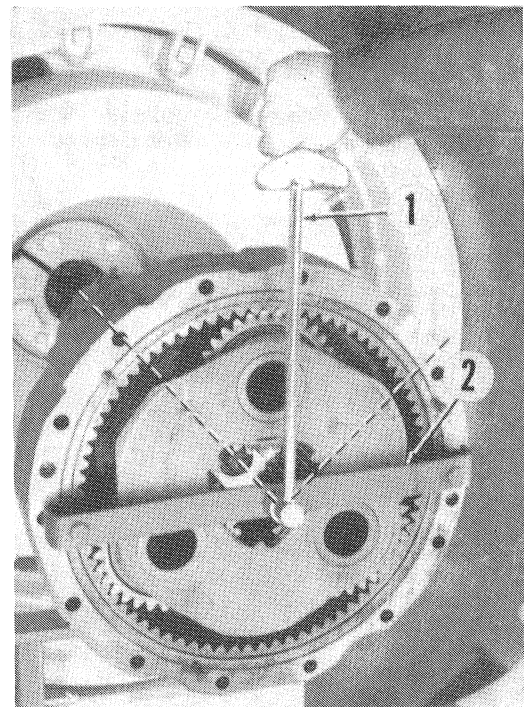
If axle assembly is not separated from wheel hub, use a torque wrench (1) and adapter tool (2) to check bearing rolling torque.
